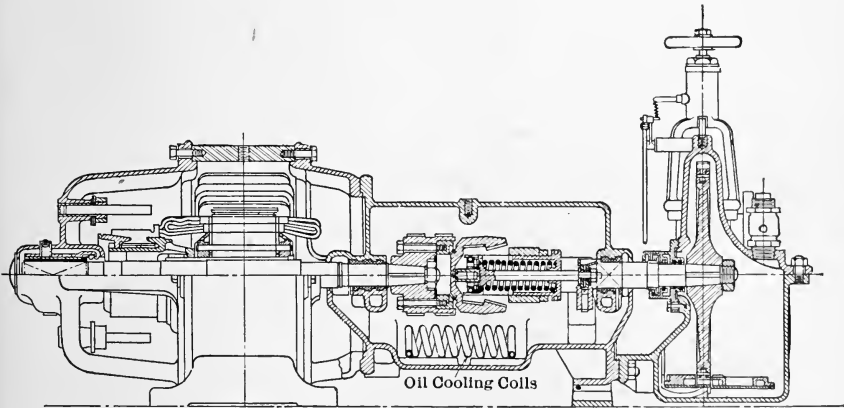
Westinghouse Impulse Turbine Connected to Generator through Reduction Gearing.
